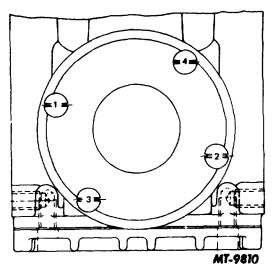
Rear Bearing Housing Screw Tightening Sequence
